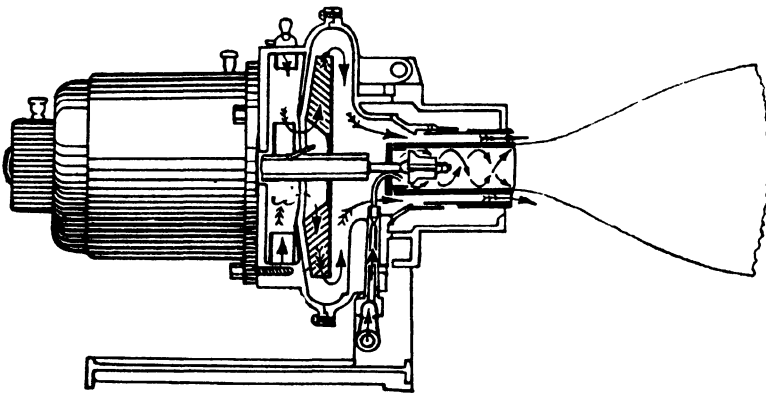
HORIZONTAL ROTATING CUP OIL BURNER
